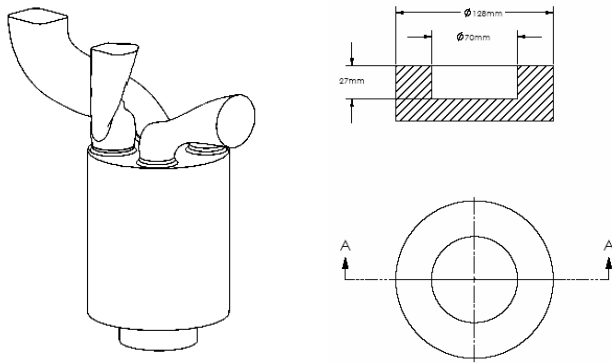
Single-cylinder of the engine and detailed piston crown.
